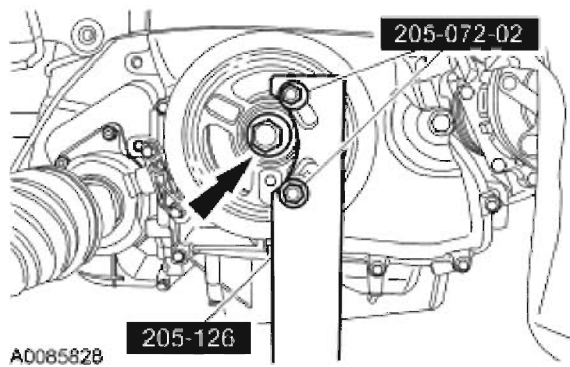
Assembling Special Tools (205-072-02, 205-126)
